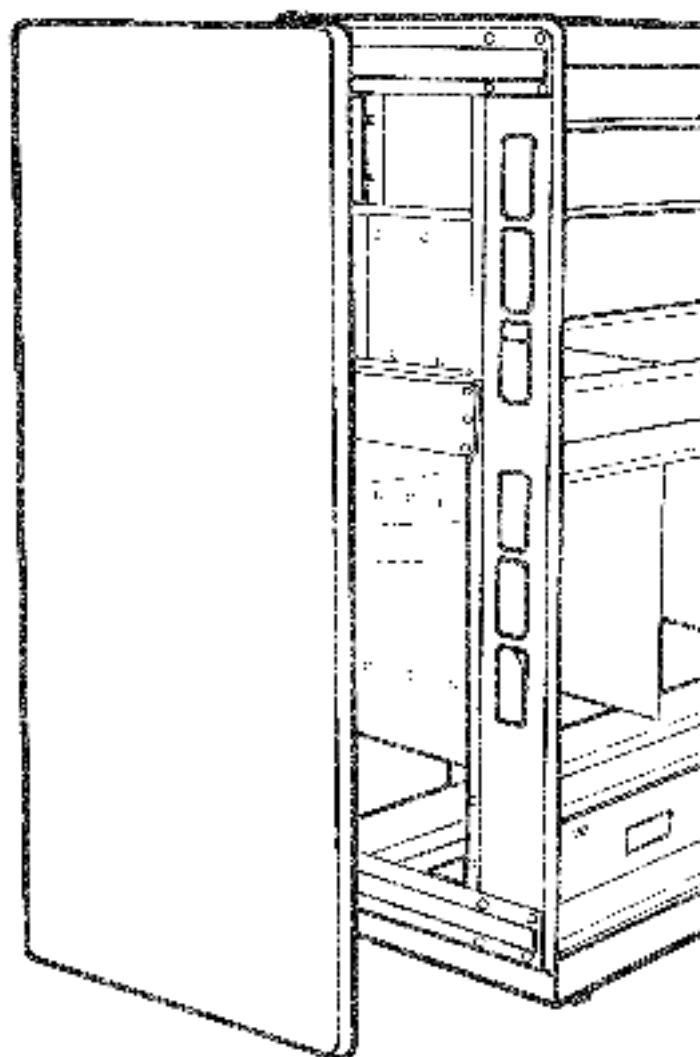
CPU and Front-End Cabinet Mating (Sheet 2 of 9)
